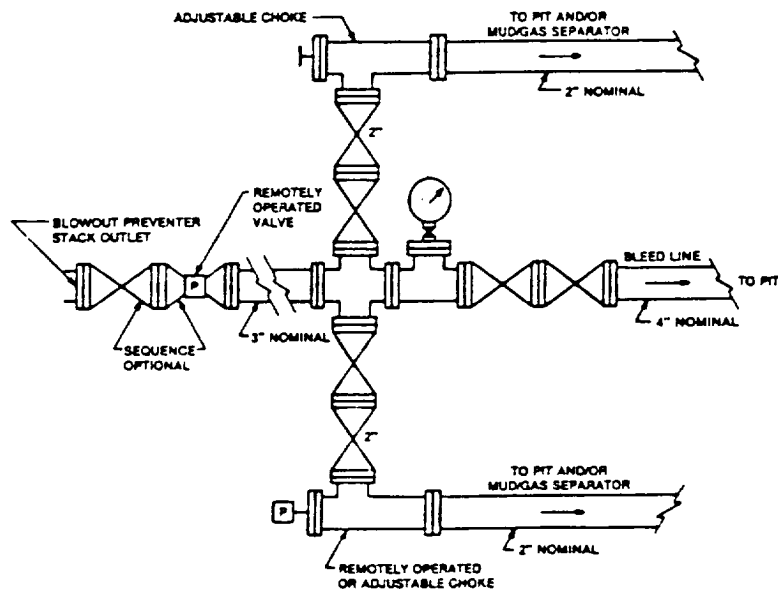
Typical choke manifold assembly for 5M rated working pressure service — surface installation.
